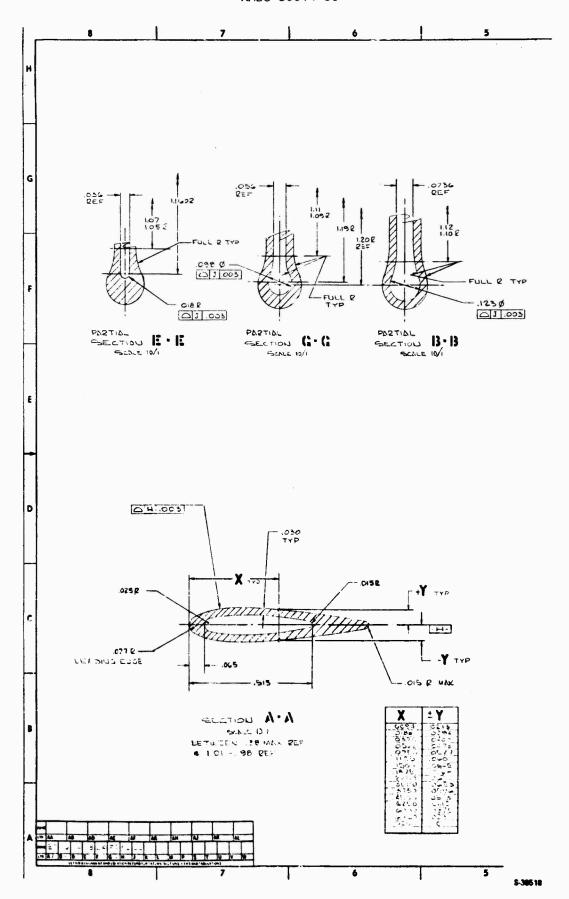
Pitot Pump Probe Assembly, 2046658 (Sheet 1)
